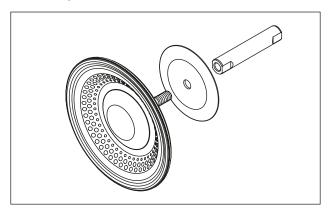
Assembly DEPA E<sup>4®</sup>compound diaphragm
